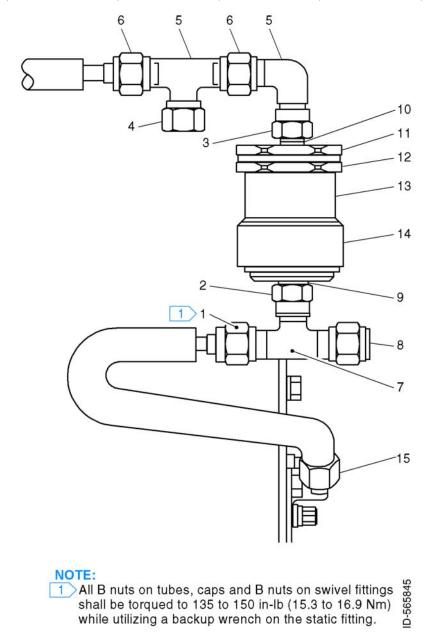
(Sheet 1 of 1) PC Filter Assembly (LTS101-650C-3, LTS101-650C-3A, LTS101-750C-1)
